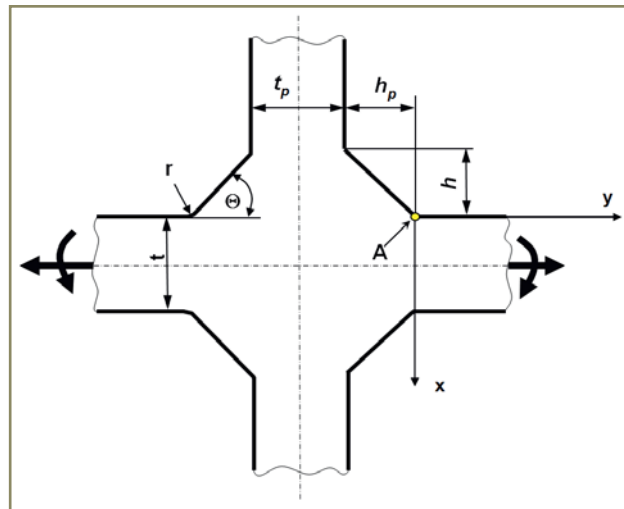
Geometry and dimensions of a cruciform welded joint subjected to axial and bending load
